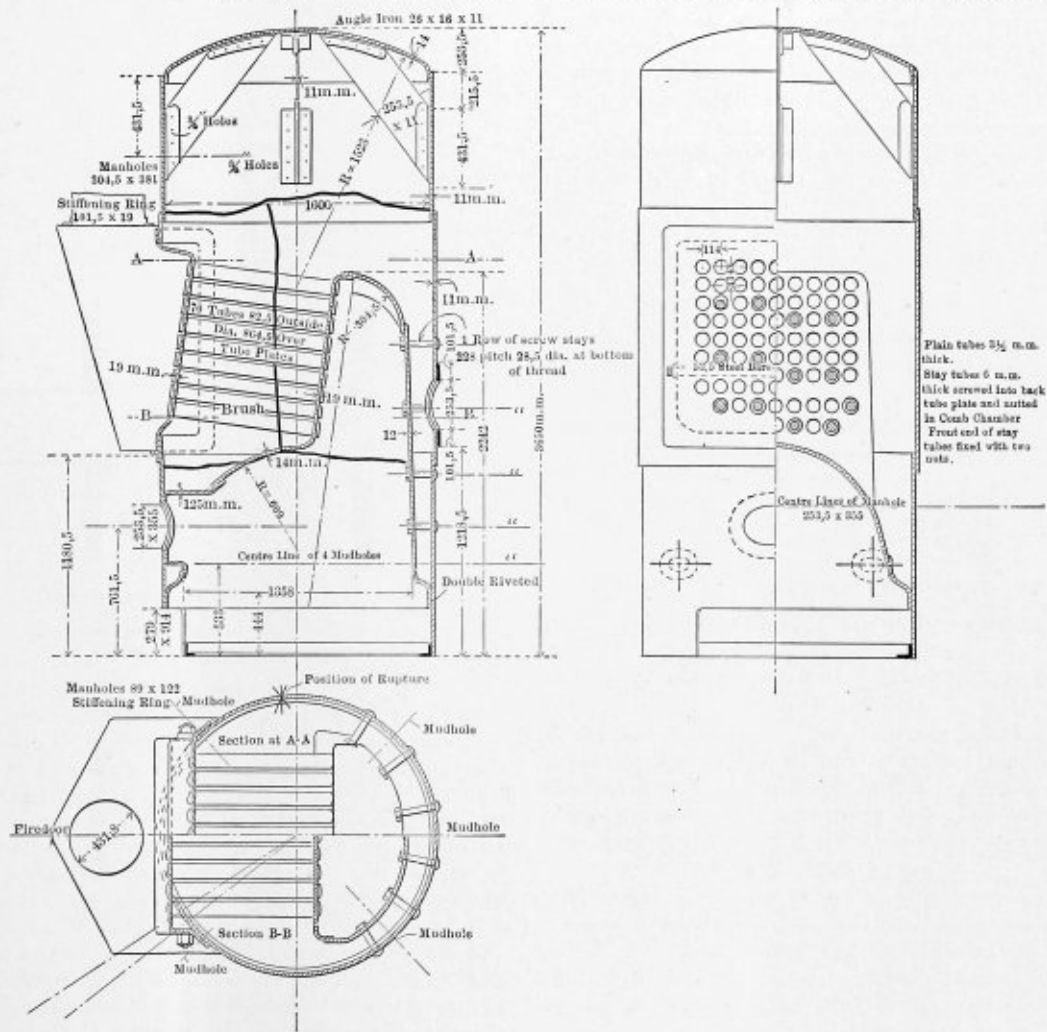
DETAILS OF THE DONKEY BOILER ON THE S. S. "VALDIVIA," SHOWING THE LINE OF FRACTURE.
